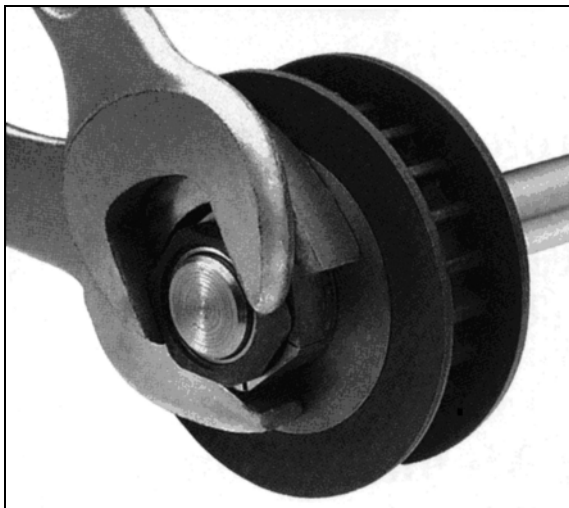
KEYLESS BUSHING TIGHTENING
